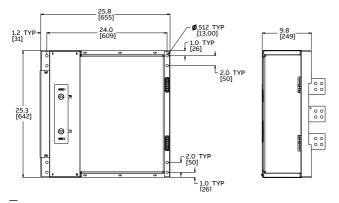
Automatic transfer switch mounting hole dimensions – R5 3-pole
